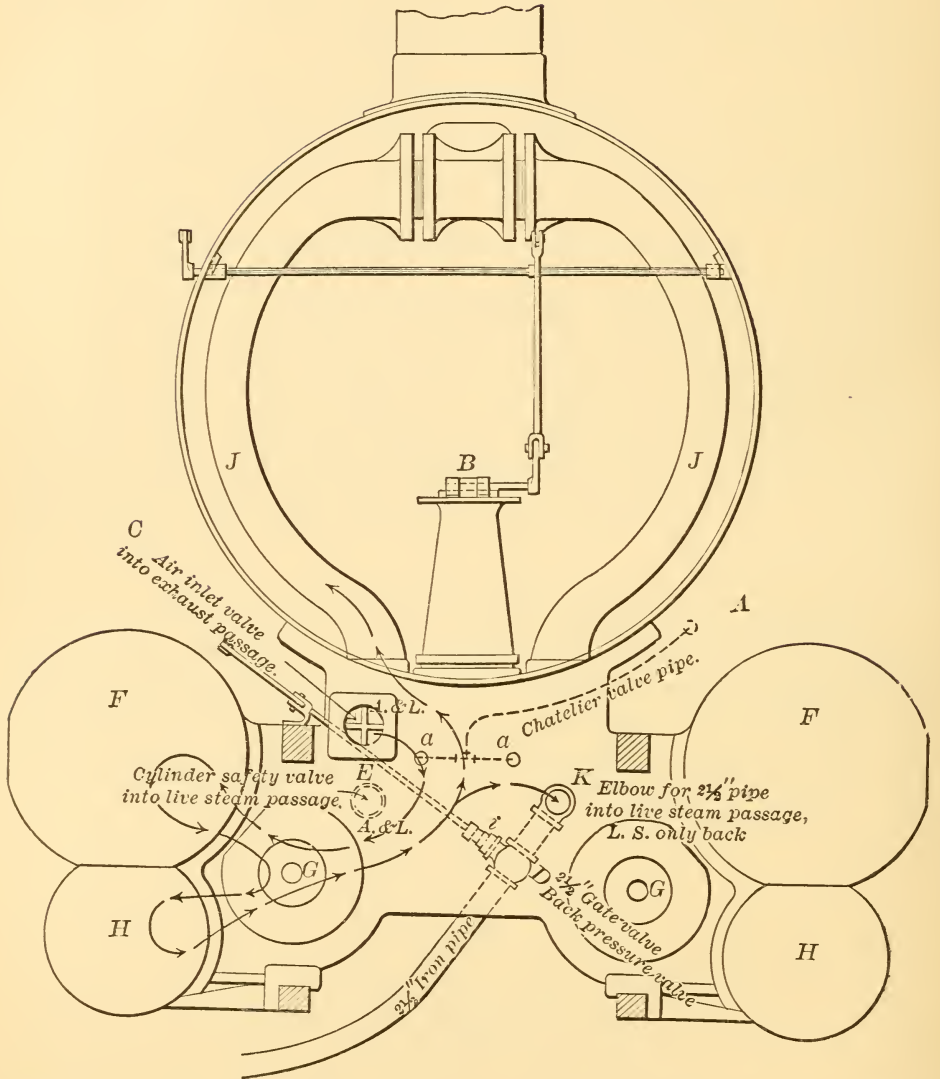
BALDWIN WATER BRAKE FOR COMPOUND ENGINE.
